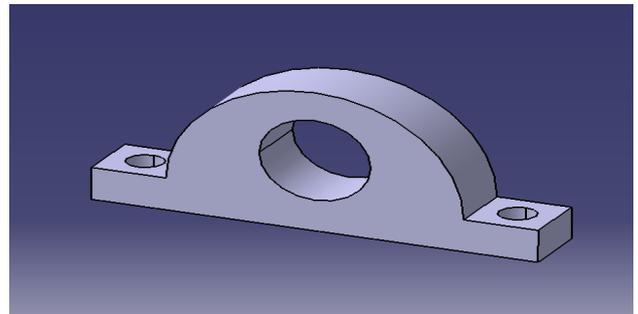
CATIA sketch of Bearing (With Bracket)
